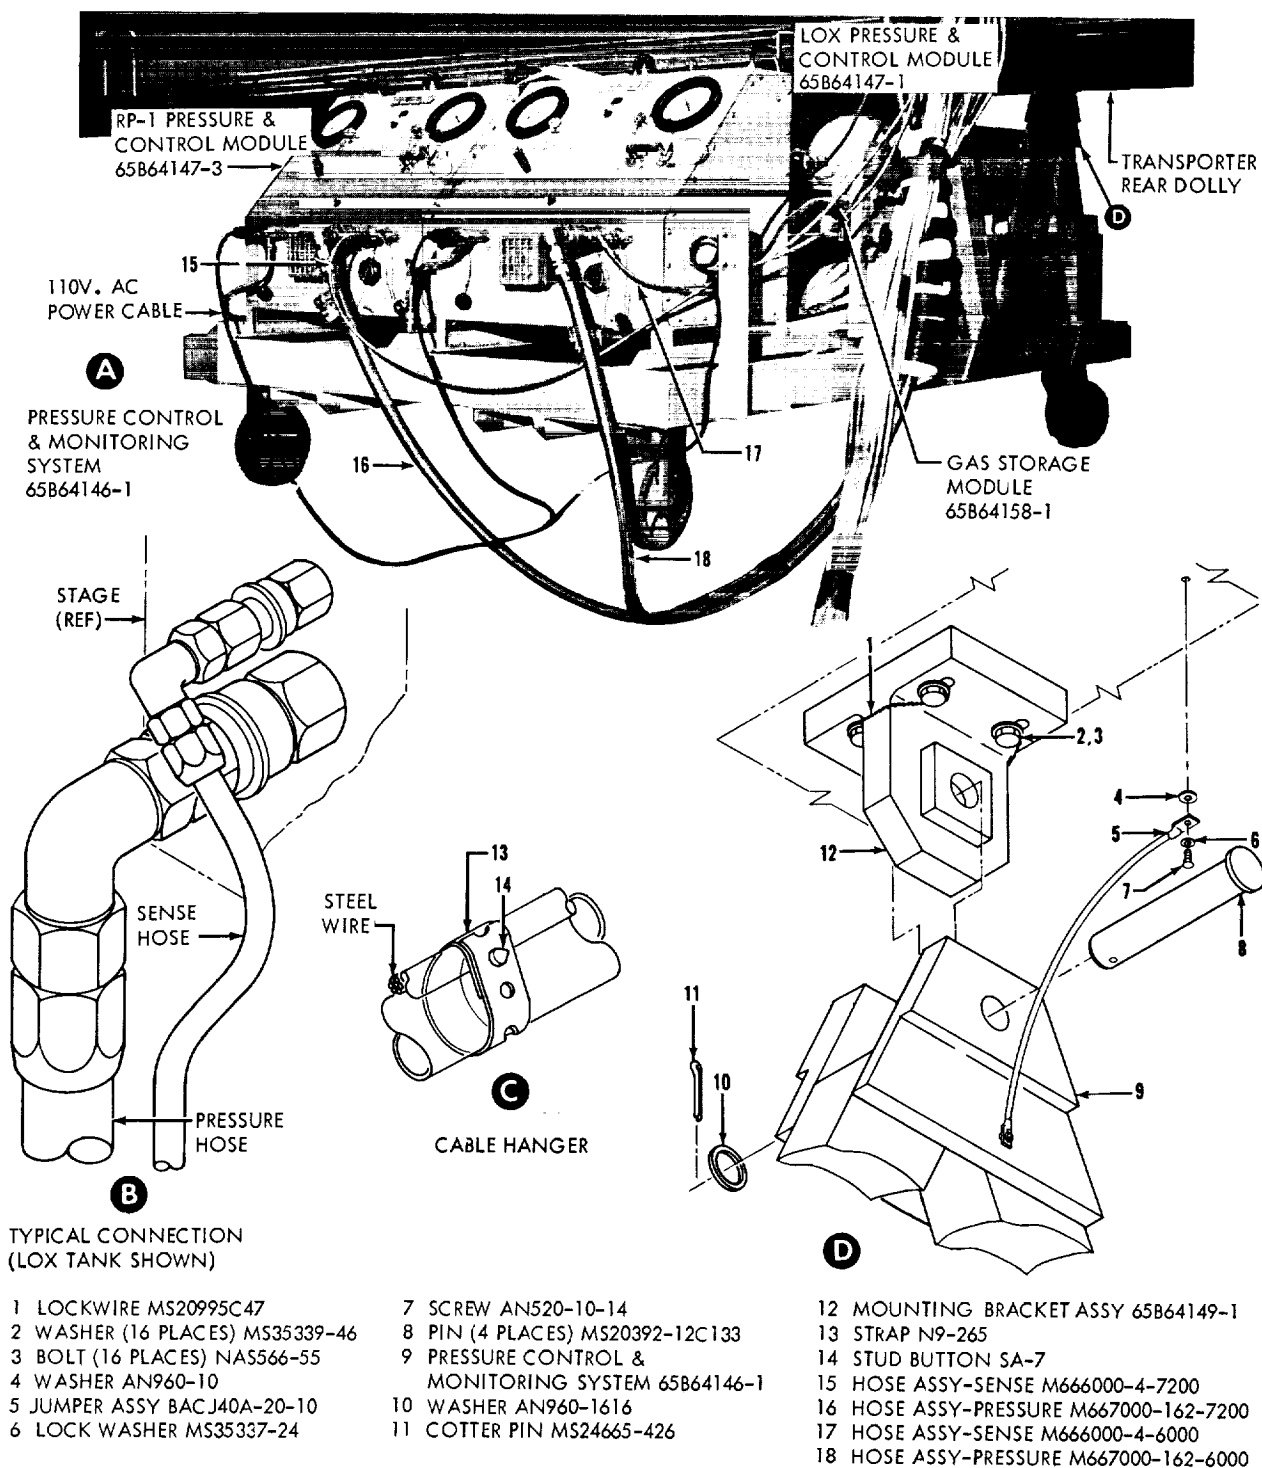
Tank Pressurization Control and Monitoring Equipment Installation (Sheet 2 of 2)
